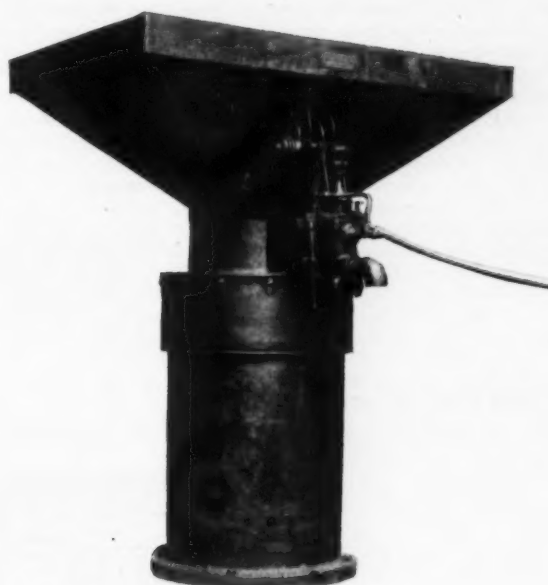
Shockless Jarring Machine. Details of Construction are shown in Fig. 12.
